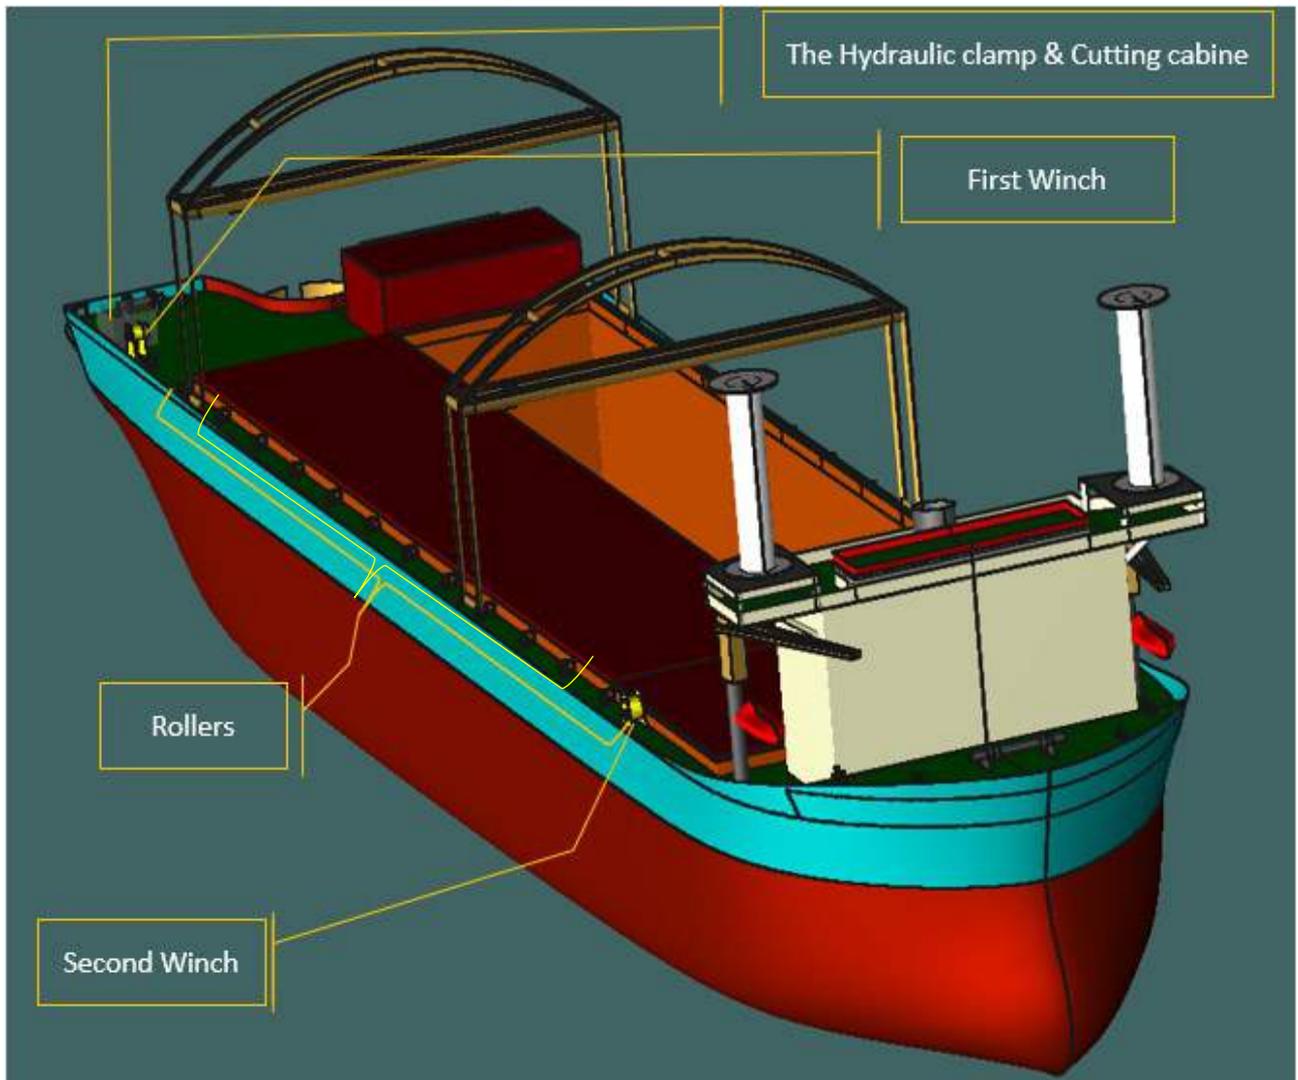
Overall View of Decom Tools Vessel & Cable Extraction Tools
